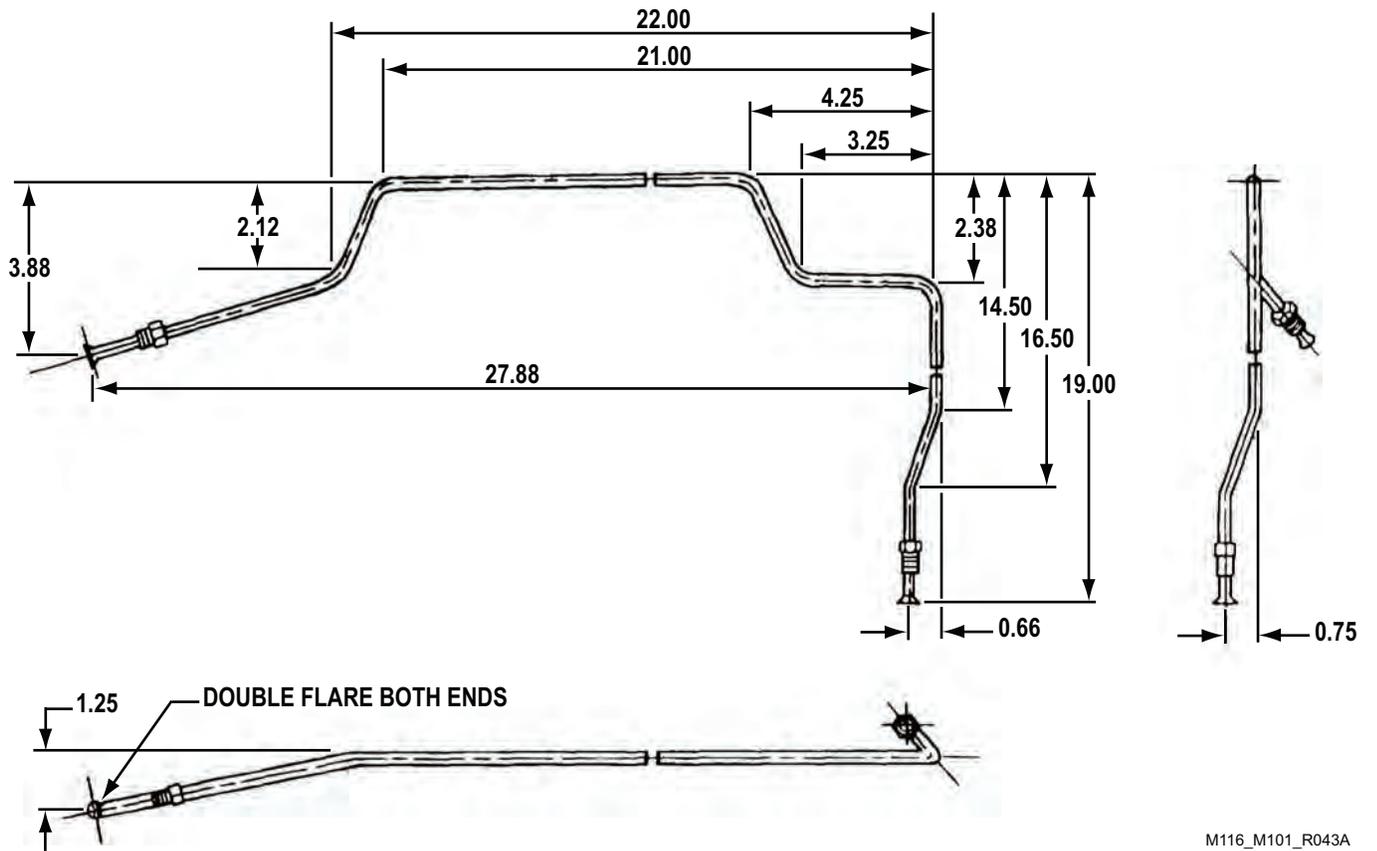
Rear Hydraulic Brake Tube Assembly (M101A1, M101A2, M101A3, and M116A3).
